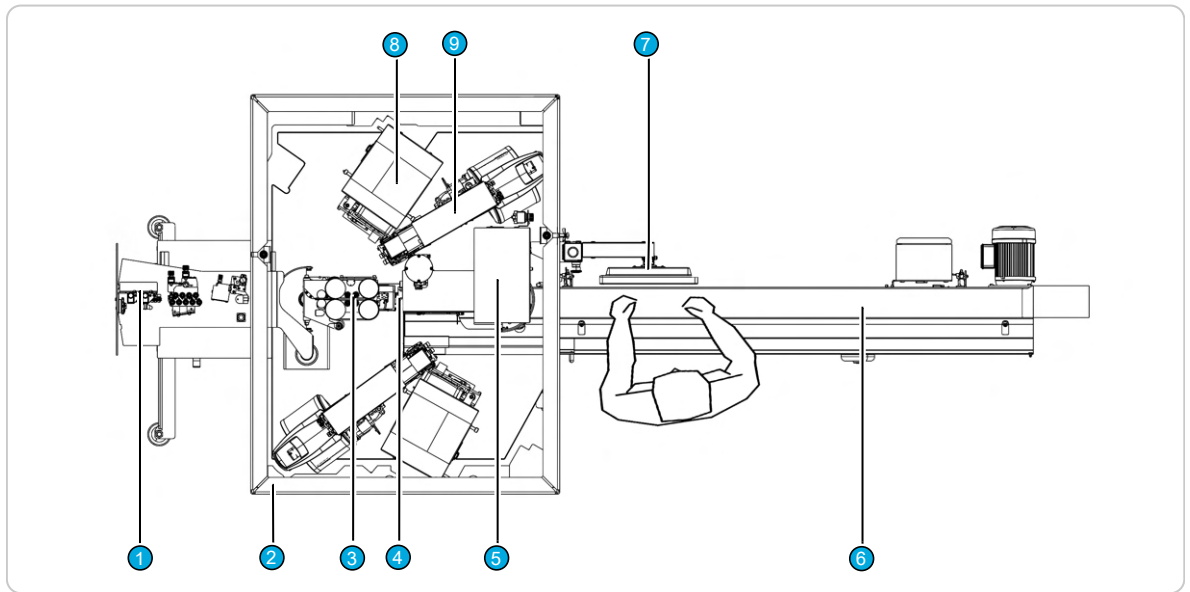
CrimpCenter 36 S - Assemblies of the basic machine
